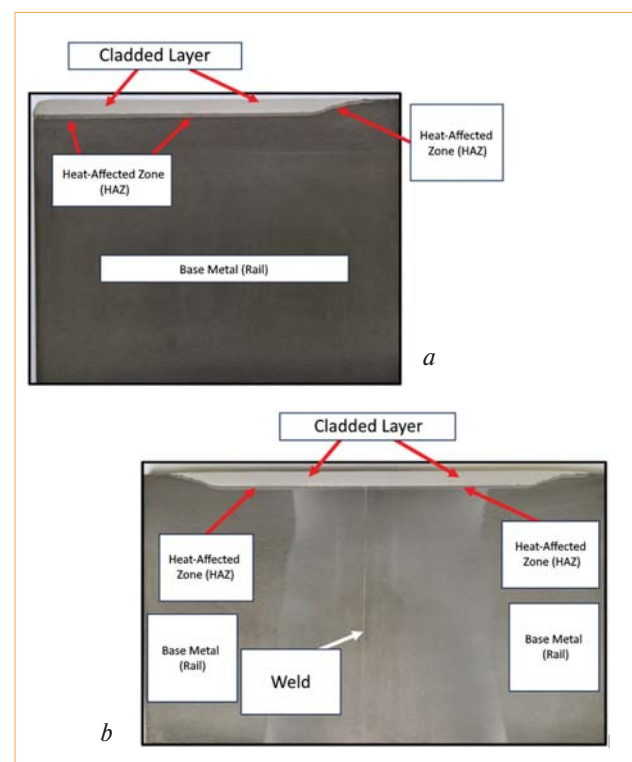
Clad rails before a grinding: *a* – end of the rail; *b* – welding joint
